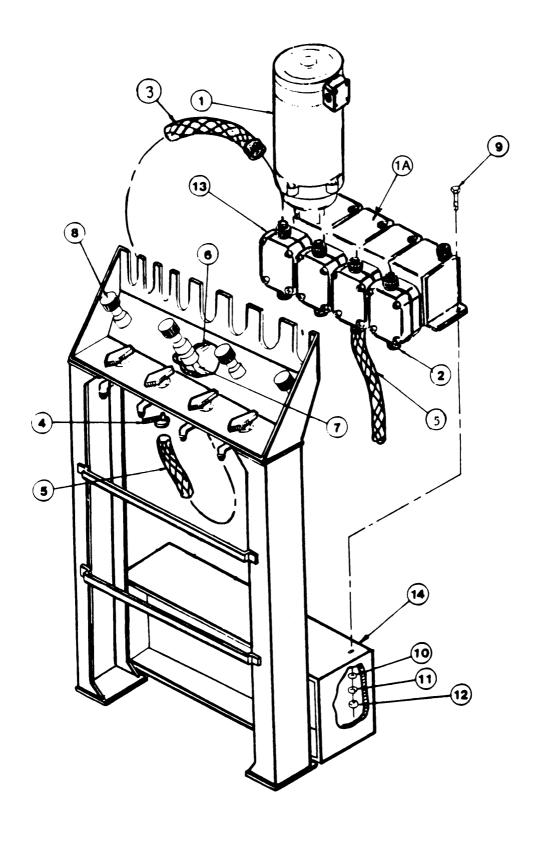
Chemical Feed Pump Assembly (USMC)
